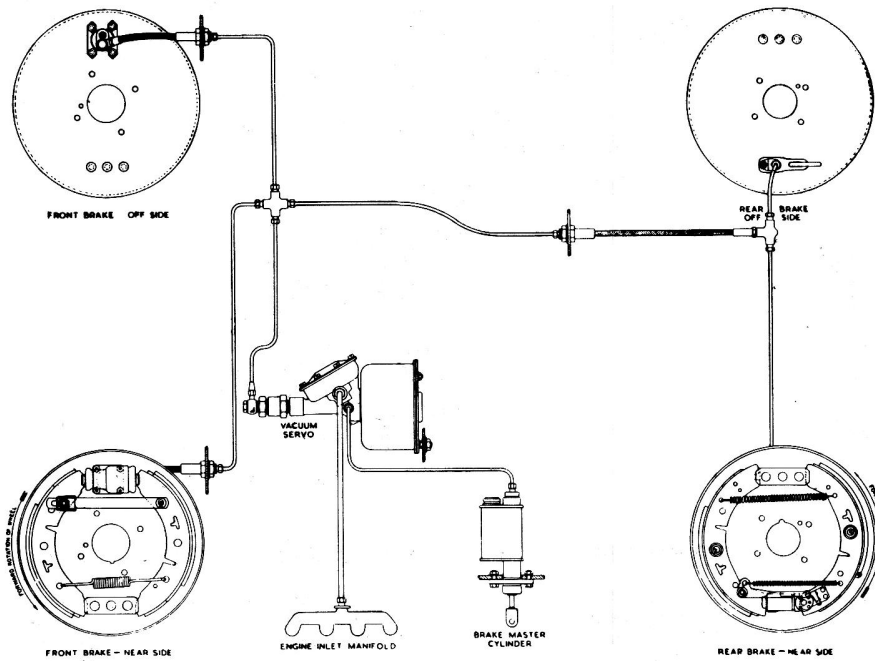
Layout of drum brake system (disc system similar except for connection at wheels)
